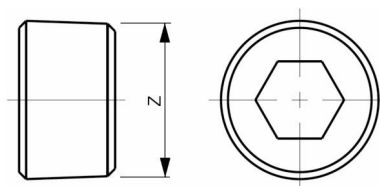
Internal drive pipe plug with conical thread DIN 906
